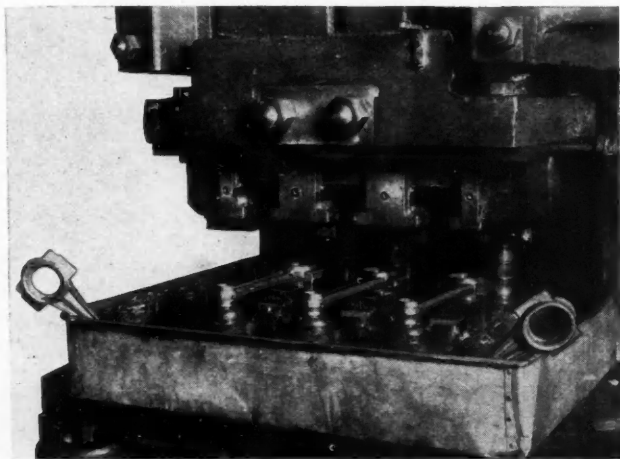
Shaving operation on a punch press which is used in place of a complete milling job for finishing big end of connecting rods to required dimensions
